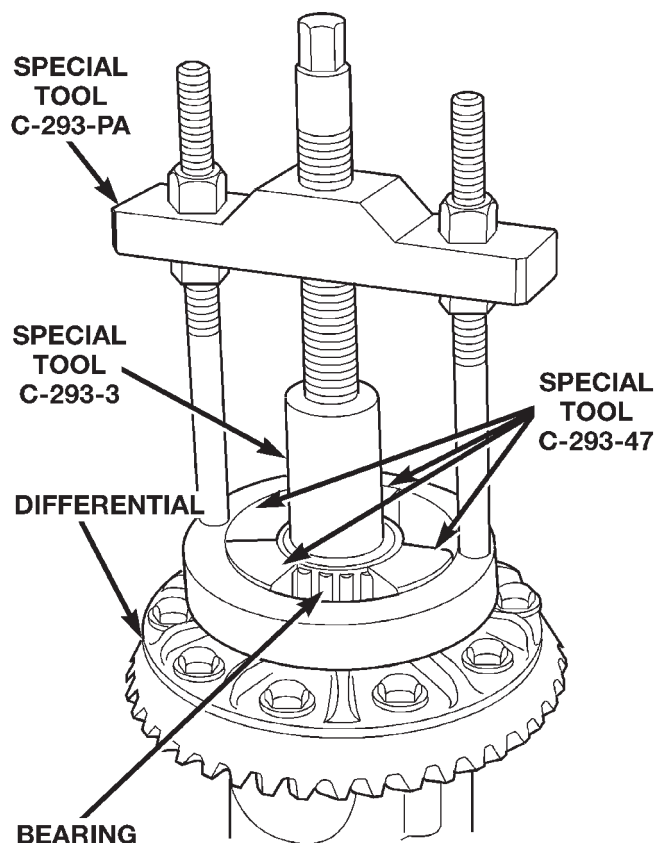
Differential Bearing Removal—8 1/4 Axle
